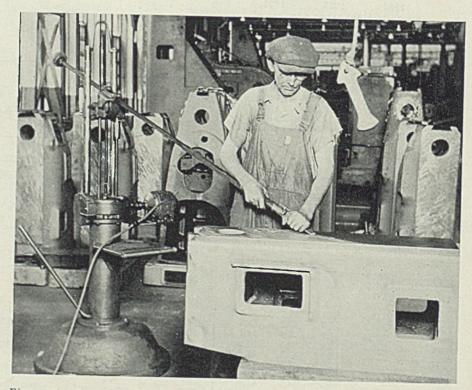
Semiautomatic rough scraping of milling machine column. Scraping tool makes about 60 strokes a minute
